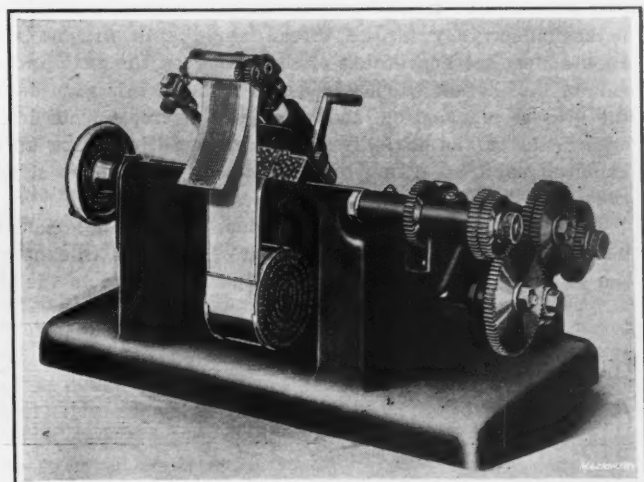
Opposite Side of Gaging Machine shown in Fig. 10, illustrating Arrangement of Reel for feeding Record Paper past Pen
